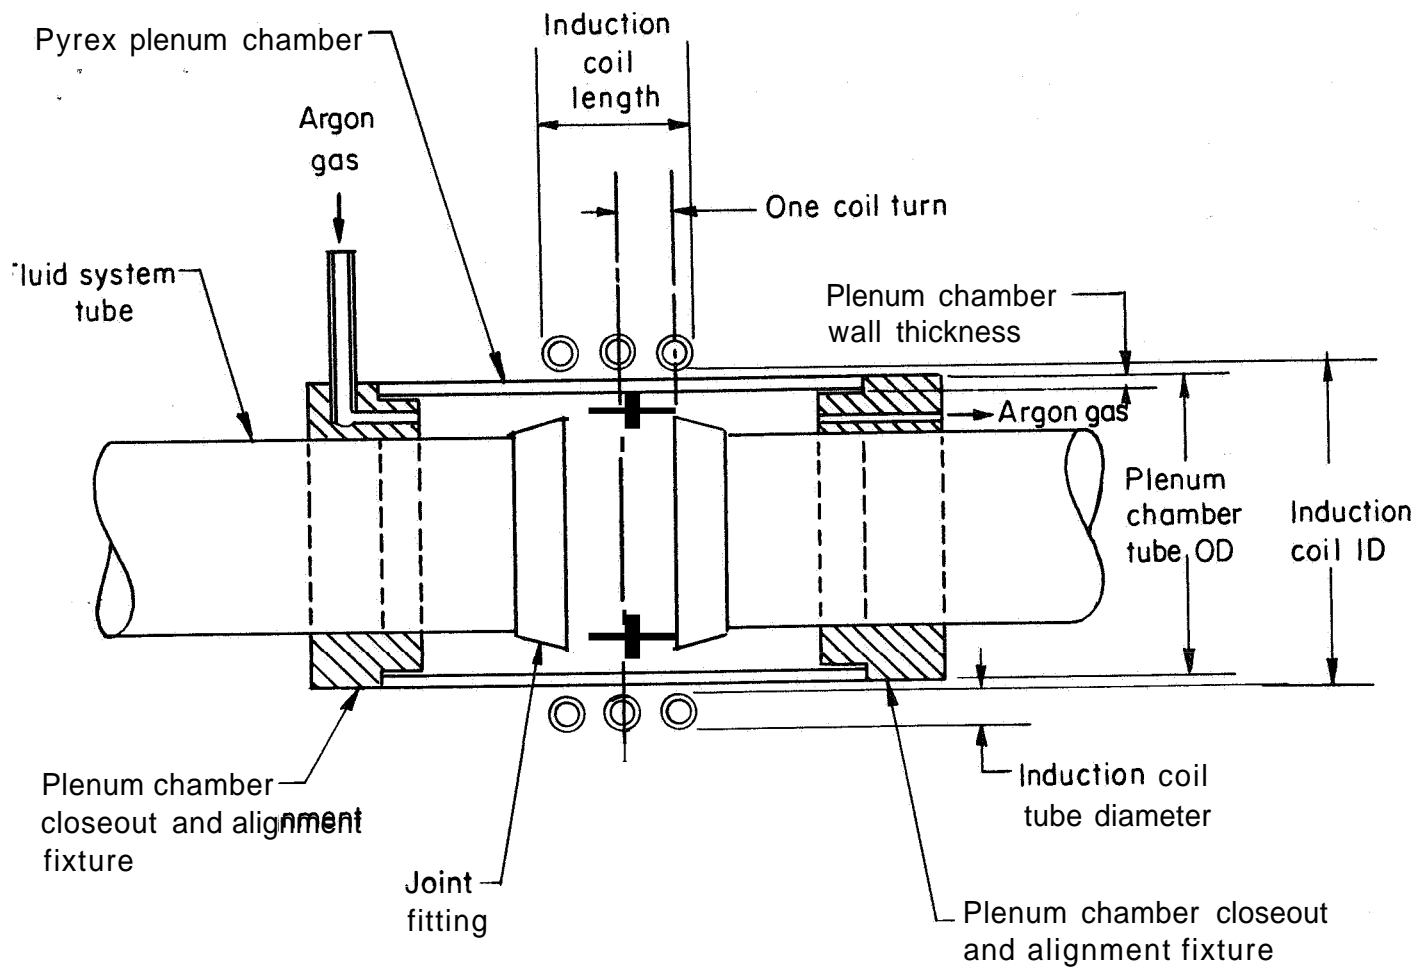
SCHEMATIC SET-UP OF TOOLING FOR INDUCTION BRAZING OF STAINLESS STEEL TUBING (Ref. 78)
